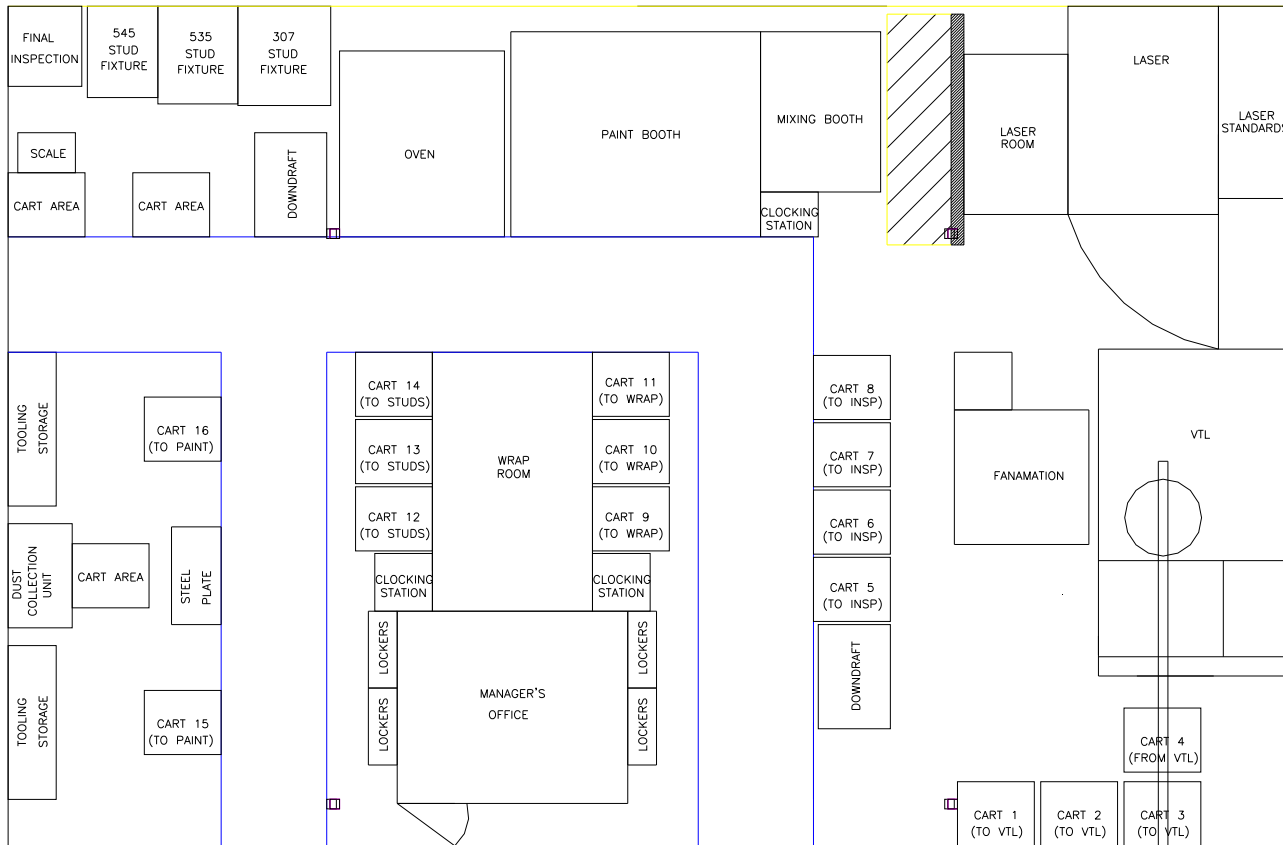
Figure A-IX: A detailed floor plan of the proposed merged manufacturing LCC cell at BAPS
